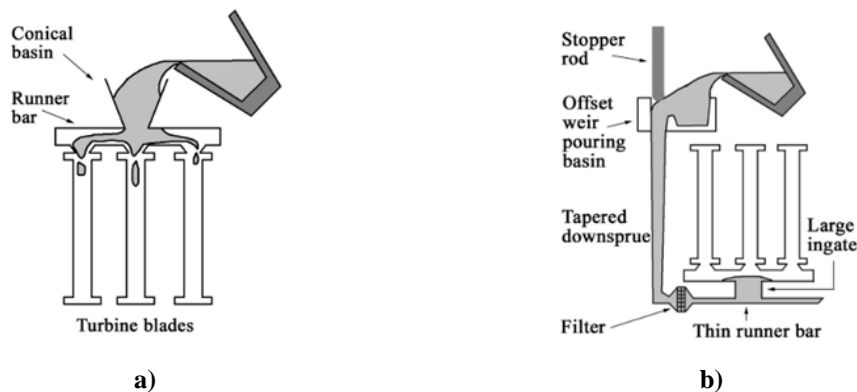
Mould design for casting turbine blades; a) top-gating and b) bottom-gating
